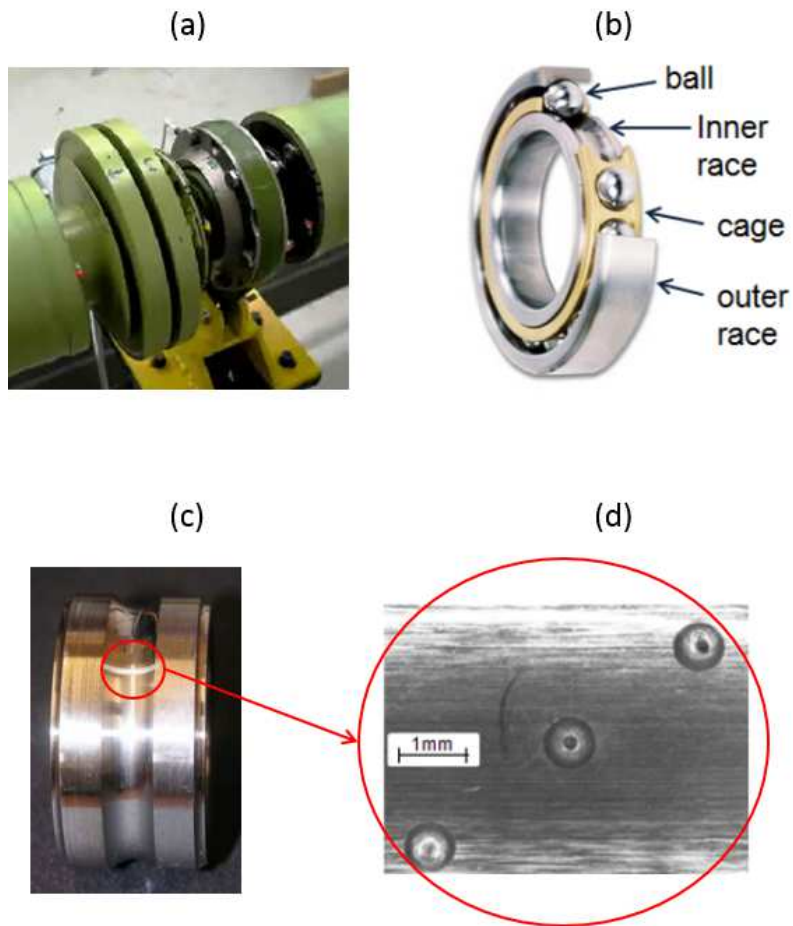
Faulted FHB: (a) assembled bearing in the drive train, (b) schematic of assembly components, (c) disassembled inner race, and (d) zoom in view of the spalled inner race fault
